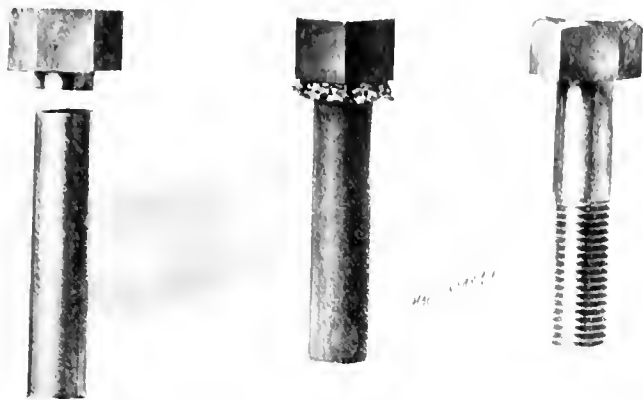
, 2, and 3. A Poppet Valve made by electrically welding a Carbon Steel Stem to a Nickel Steel Head.
